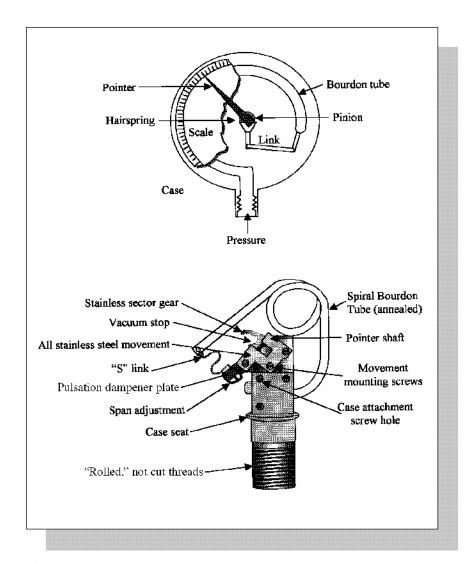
(Top) Bourdon tube gauge; (bottom) internal components.
